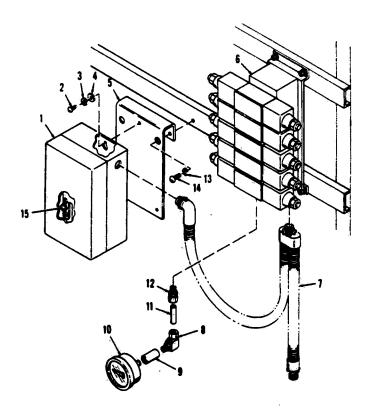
HYDRAULIC MOTOR STARTER ARRANGEMENT:
